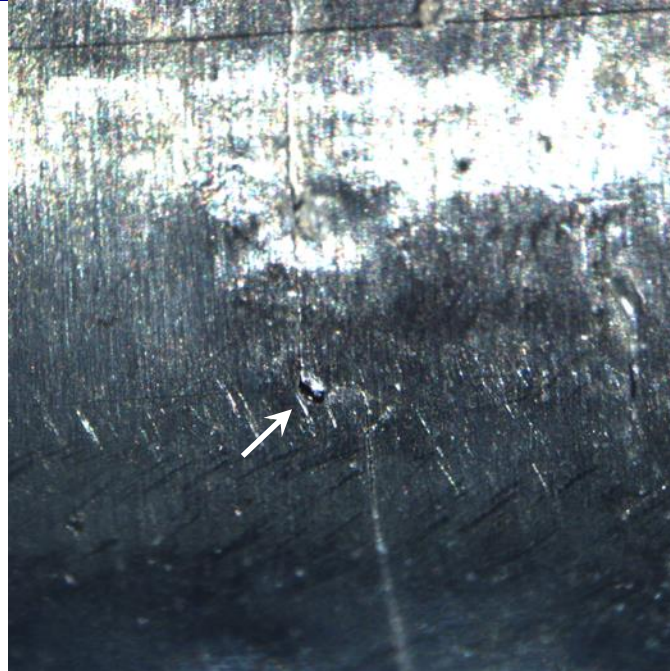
Micrograph of part of the surface of ZRAP13 rod showing transverse fracture of about 4 mm length kinked near a surface flaw.
